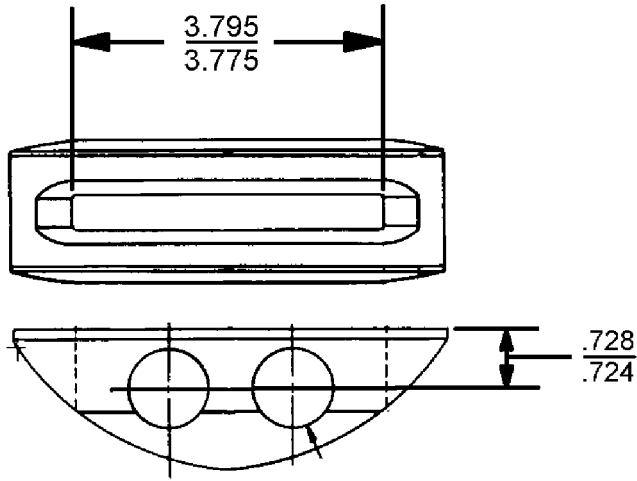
G. 652833 COUNTERWEIGHT ASSEMBLY MADE WITH 652834 COUNTERWEIGHT AND 628978 BUSHINGS
